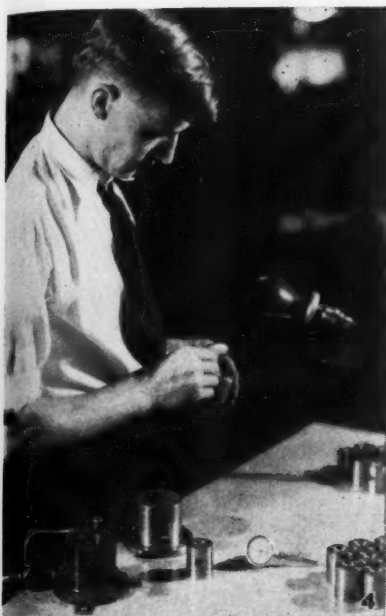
Using a magnifying glass to examine the surface of a valve seat. The slightest scratch or minutest defect is cause for rejection.
